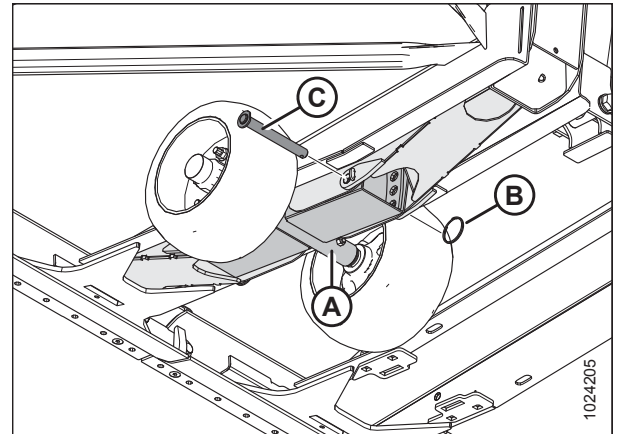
Inboard Wheel Assembly and Left Header Leg – View from Below, Right Opposite
